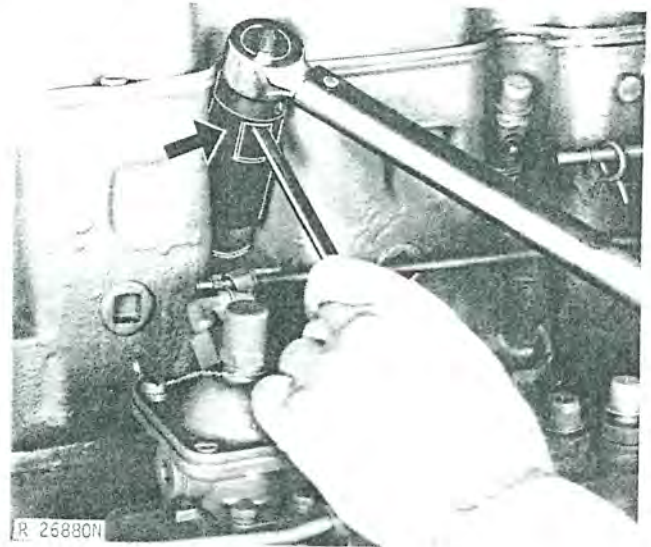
Tightening KDEL Injection Nozzle Using JDE-92 Nozzle Socket Wrench
